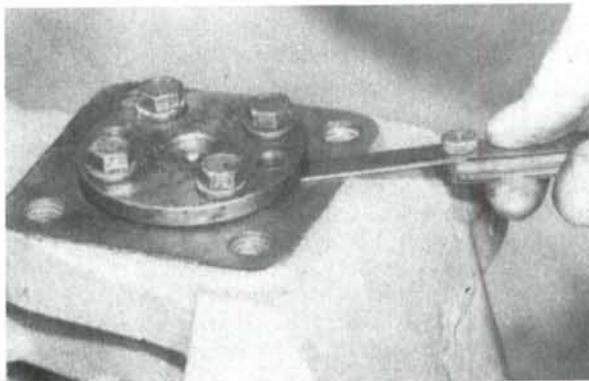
To set bearing pin preload, use a feeler gage to measure gap between bearing pin flange and stub axle housing. Refer to text.
